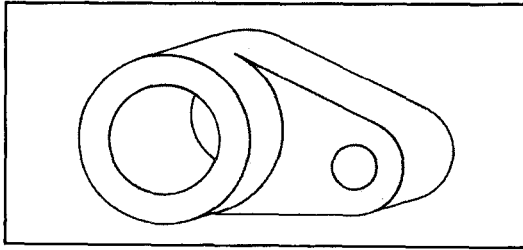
Oblique drawing. This pictorial method is useful for portraying cylindrical parts. Projectors are oblique to the picture plane.
